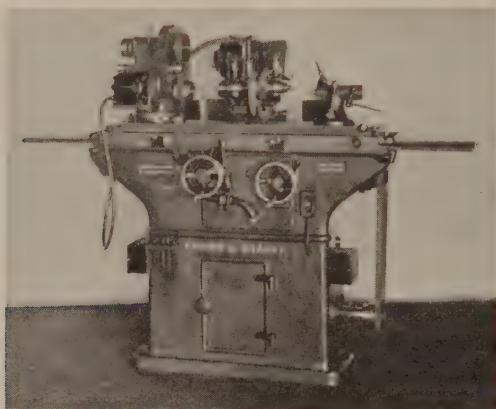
Motor-driven universal grinding machine. Practically the same as the belt-driven machine (Fig. 275) except that it is driven by individual motors, one mounted on the wheel stand, the second on the headstock, and the third at the rear of the machine for driving the worktable and the pump. (Courtesy of Brown & Sharpe Manufacturing Company.)
